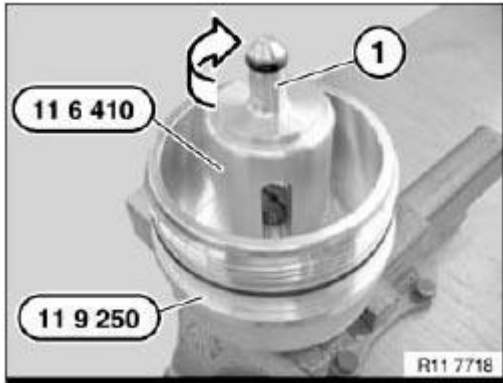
Identifying Screw Piece With Special Tools (11 6 410 And 11 9 250)
